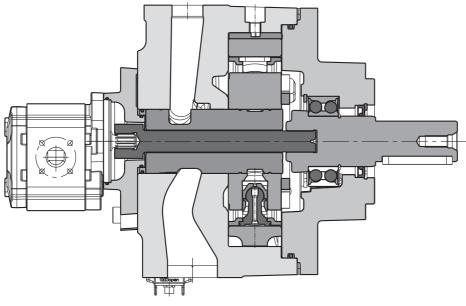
Radial piston pump with add-on gear pump using SAE-A adapter
